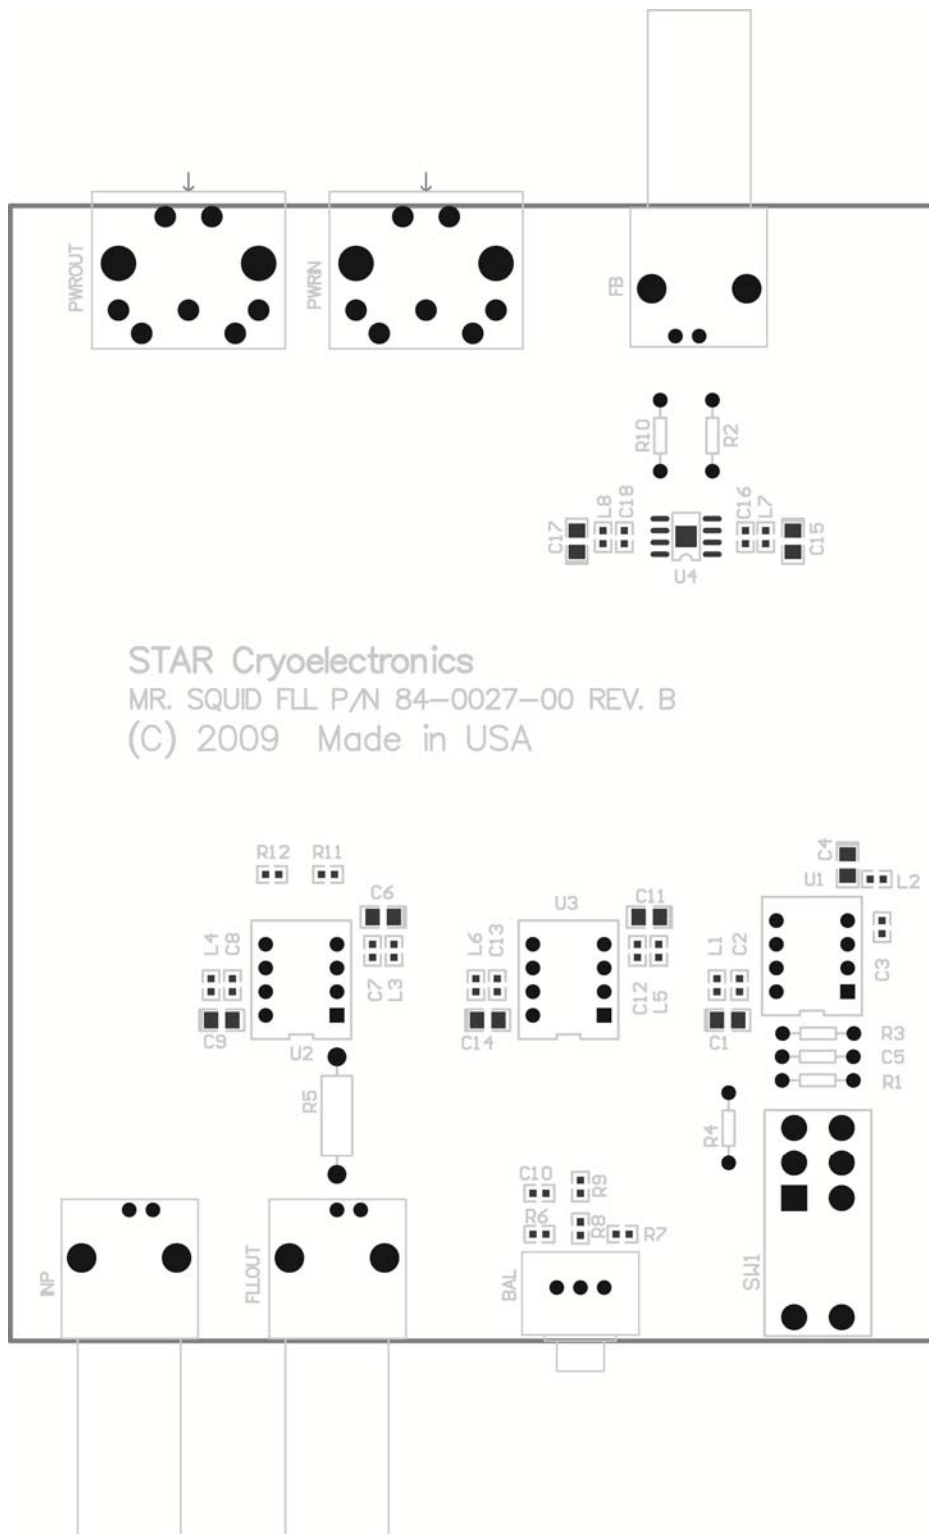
Assembly drawing of the MS-FLL flux-locked loop board with component designators.
